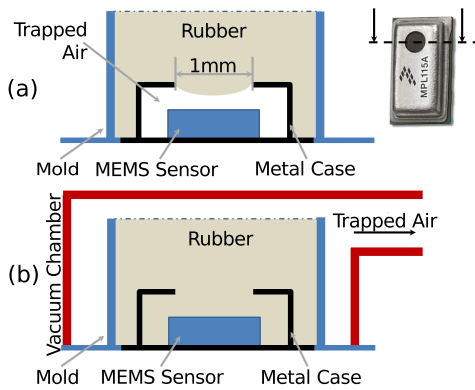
The rubber casting process of the MEMS barometer sensor. (a) Air bubble is trapped inside the MEMS barometer when one is cast in rubber. (b) Vacuum degassing eliminates air bubbles allowing the casing to be filled with rubber.
